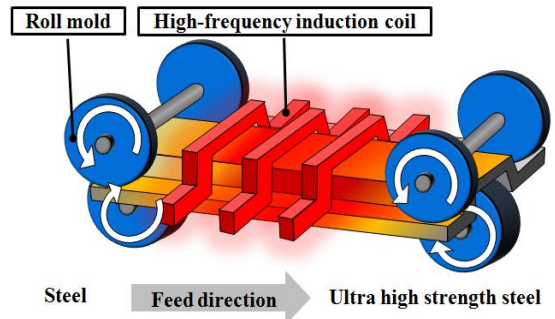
Schematic of roll forming and hot stamping<sup>[6-7]</sup>
